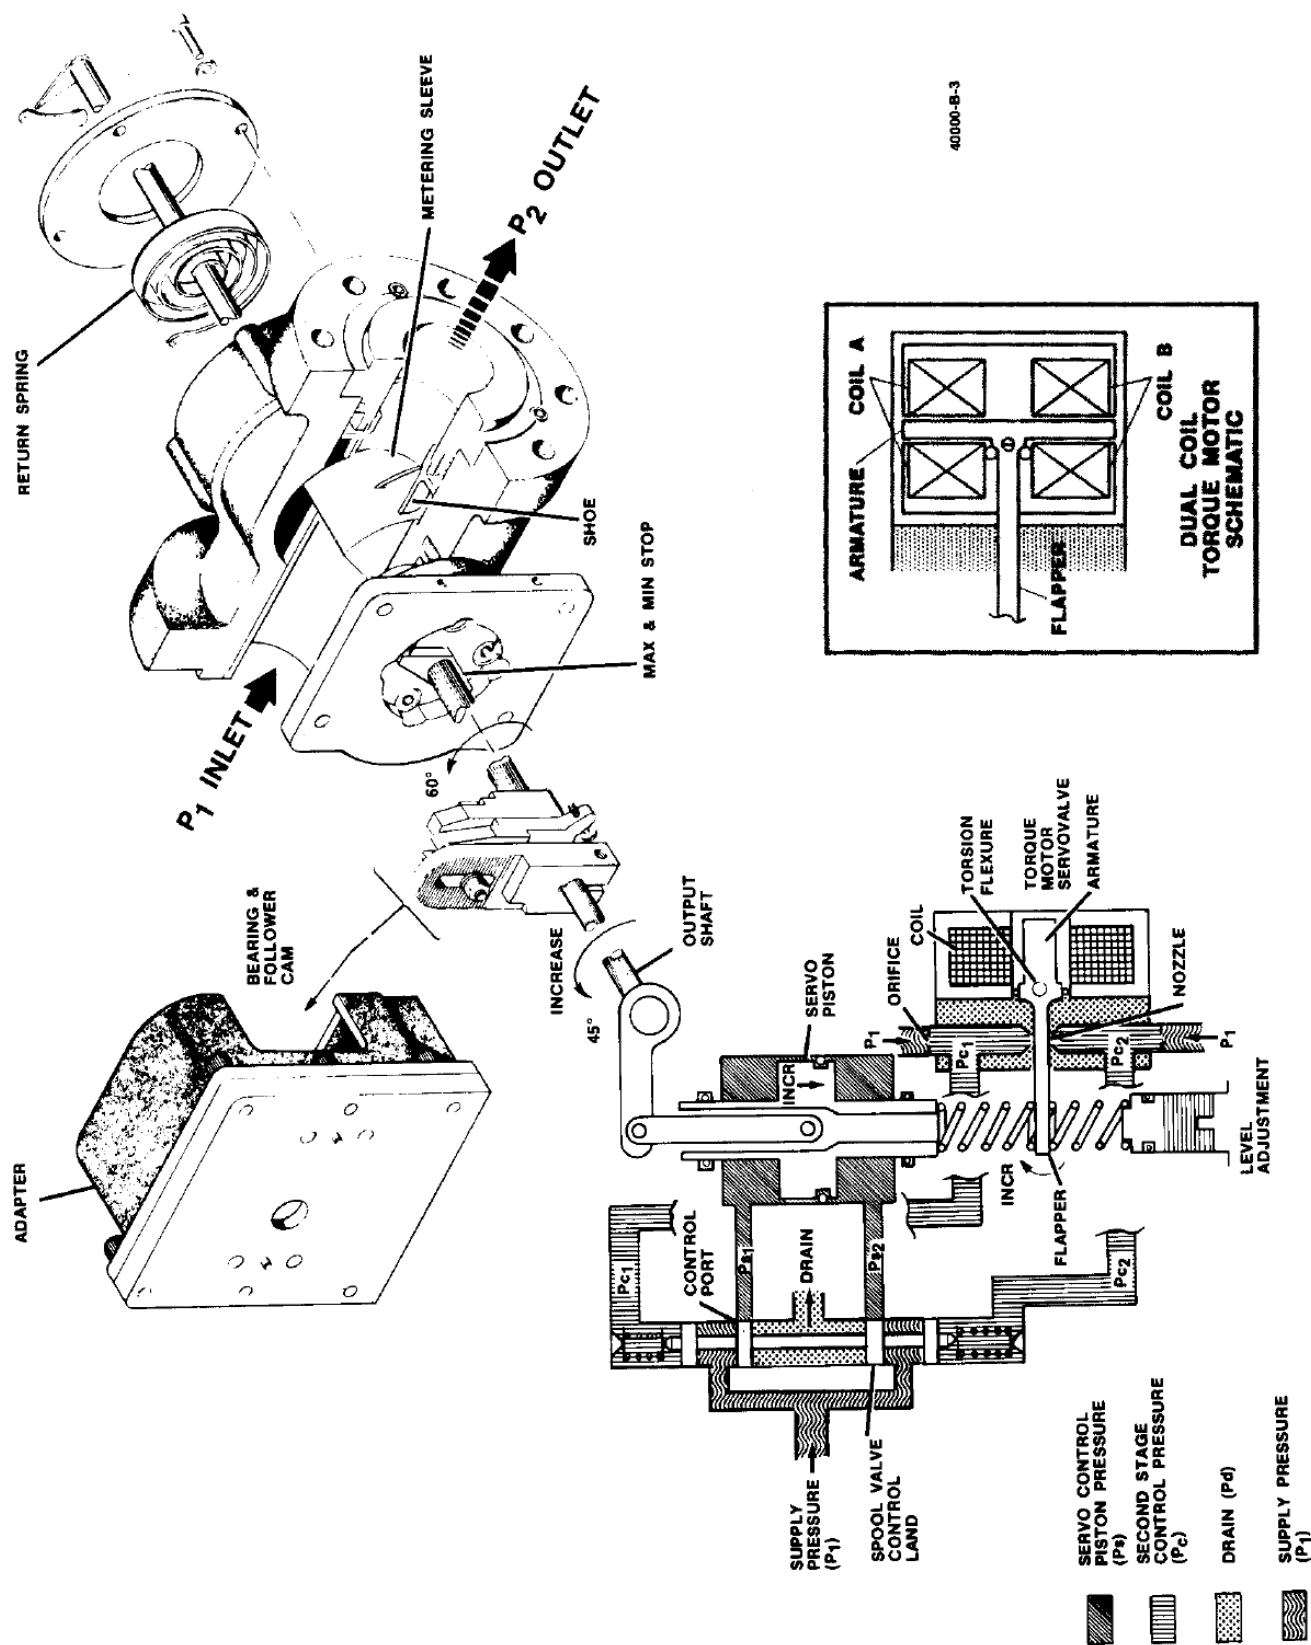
Schematic Drawing, 3103 Gas Valve with TM-55P Actuator
